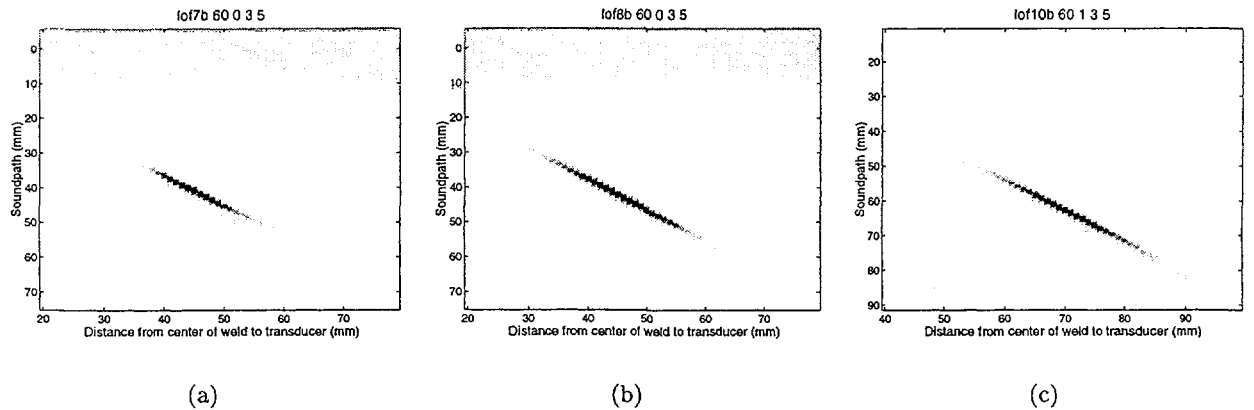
Backside measurements from lack of fusion using the 60-degrees 3.5 MHz transducer (a) 2.9 mm crack, 23.5 mm from bottom surface (b) 6.9 mm crack, 29.4 mm from bottom surface (c) 6.9 mm crack, 17 mm from bottom surface.
